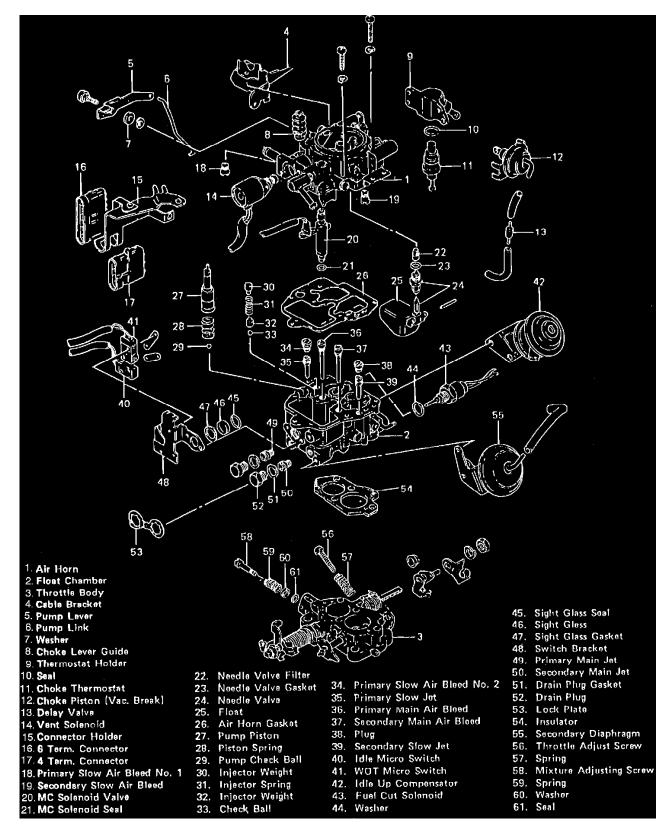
Typical Exploded View Of Hitachi MR08 Carburetor
